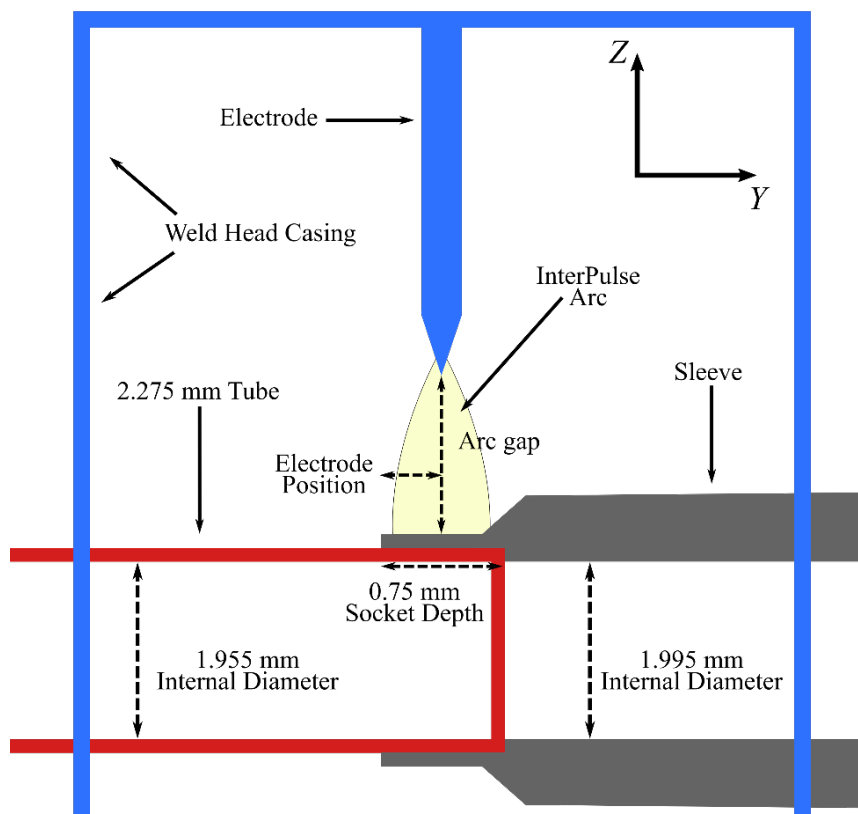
Cross-section view of inside the weld head illustrating the roles of the welding parameters. The blue lines are parts of the Polysoude UHP 250 weldhead and the electrode, the red line represents the CP-2 Ti tubing, and the grey areas show the sleeve fitting.
